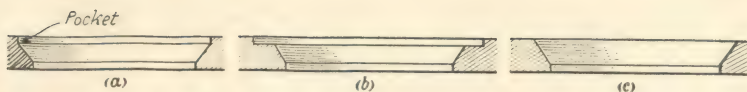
METHODS OF RECONDITIONING VALVE SEATINGS
